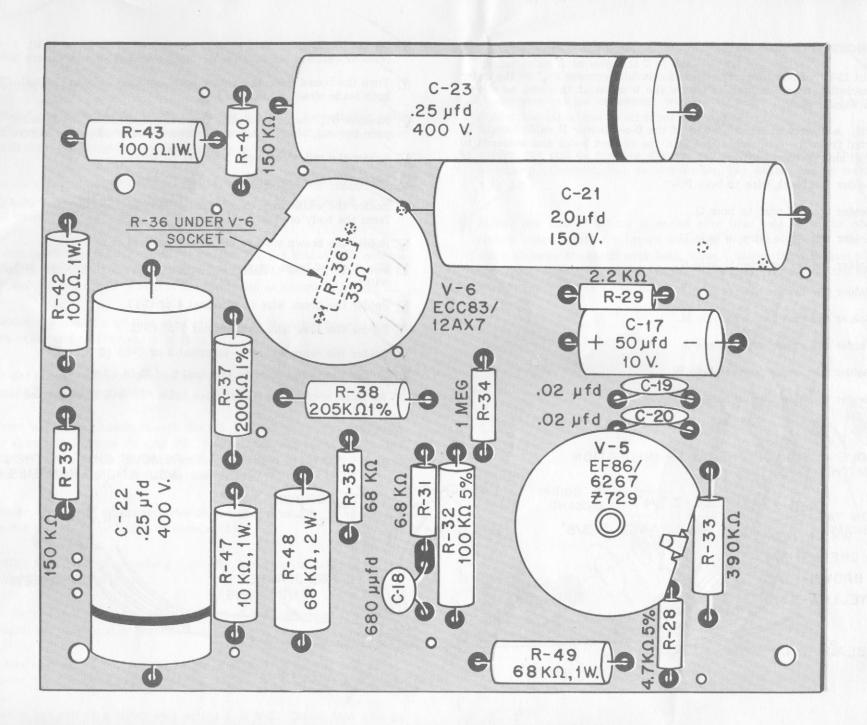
MOUNTING PARTS ON PRINTED CIRCUIT BOARD 820046
